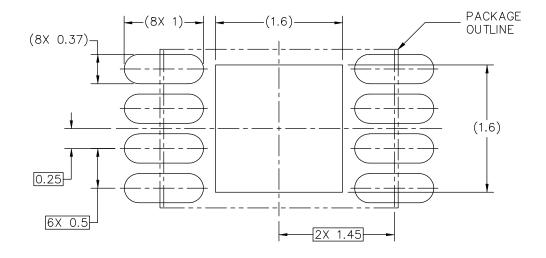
PCB footprint for SOT1089 (XSON8); reflow soldering
